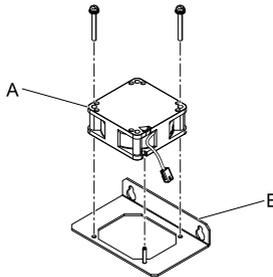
Remove the Circuit Board Cooling Fan Units
